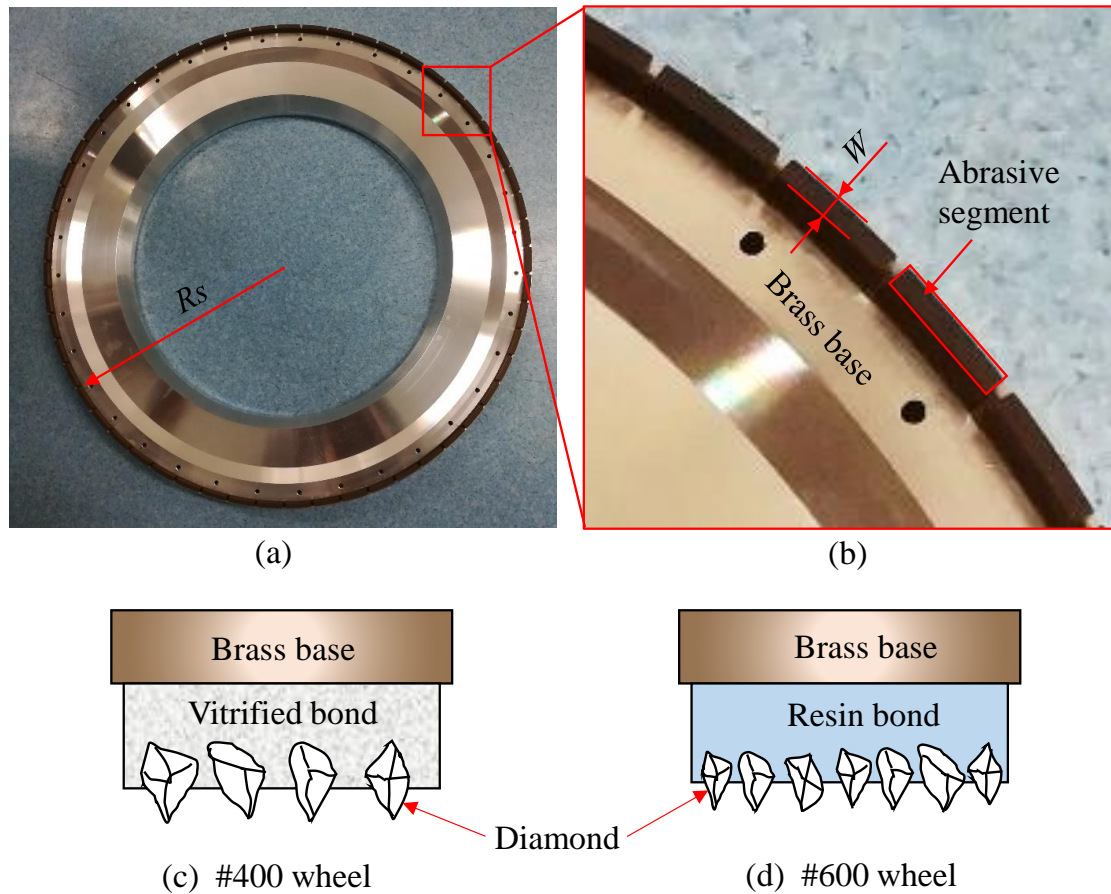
Photographic views and schematics of the grinding wheels. (a) Photographic view of the grinding wheel, (b) zoom-in view of the inset in (a), (c) schematics of #400 wheel construction, (d) schematics of #600 wheel construction.
